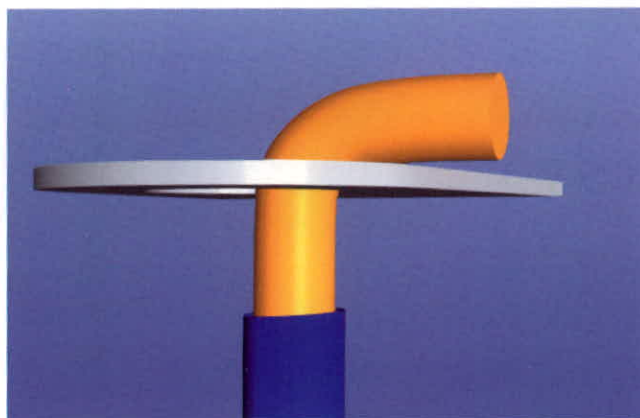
Pierced or Perforated Terminal Wire Wrap
